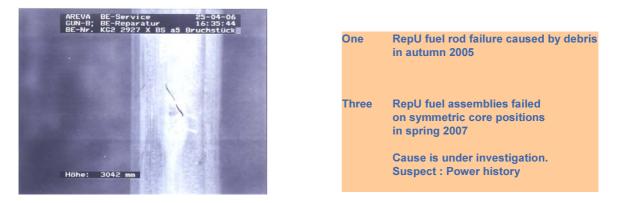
Mechanical behaviour of ERUFA in Gundremmingen B.
